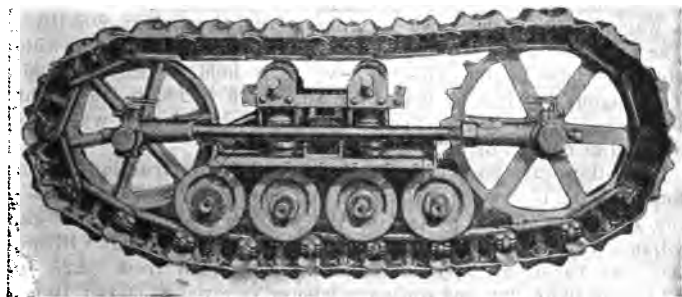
Platform Wheel of Holt Caterpillar Tractor.
